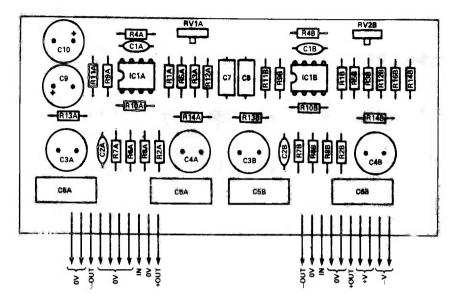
Overlay of the PCB for the balanced output driver — this is a stereo board, so only one is required, but note the components that you have to obtain two of.
